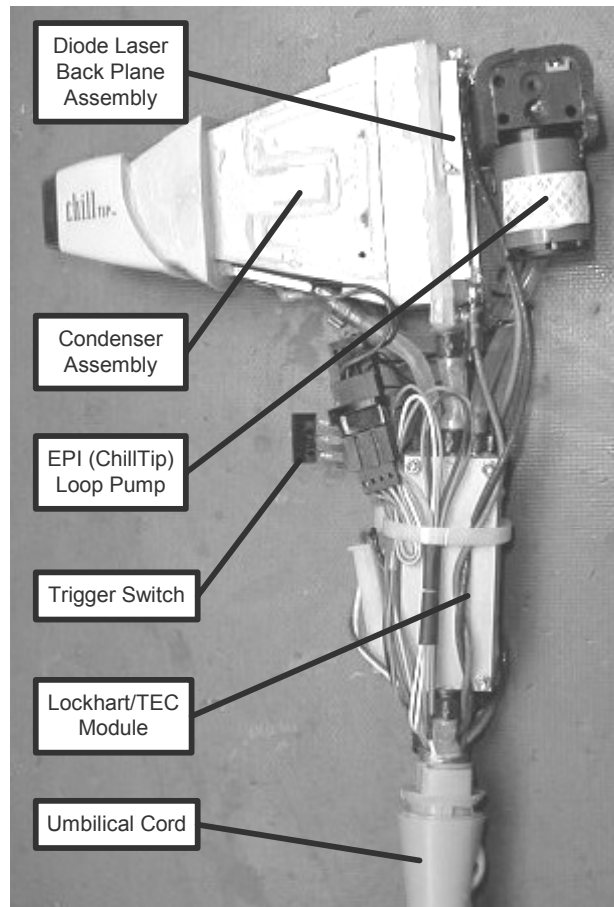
Component Location, Handpiece Assembly, Left Side View
